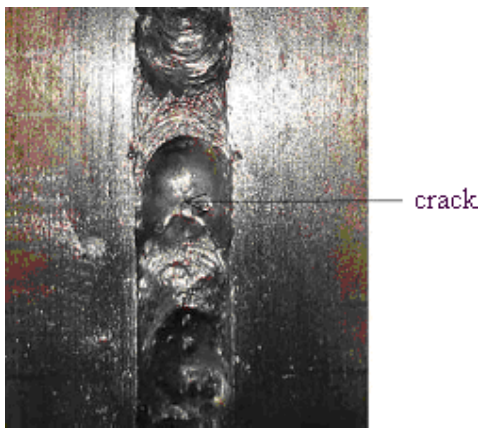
Photograph of the crack formed after third welding pass in Specimen A2.
